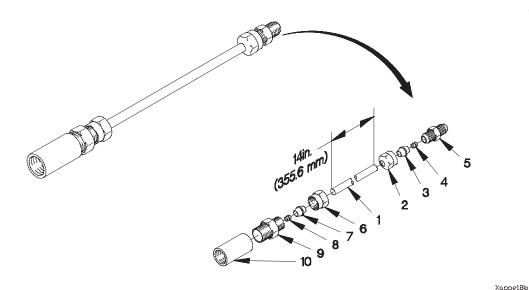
M1089 30K Winch Pneumatic Test Adapter
